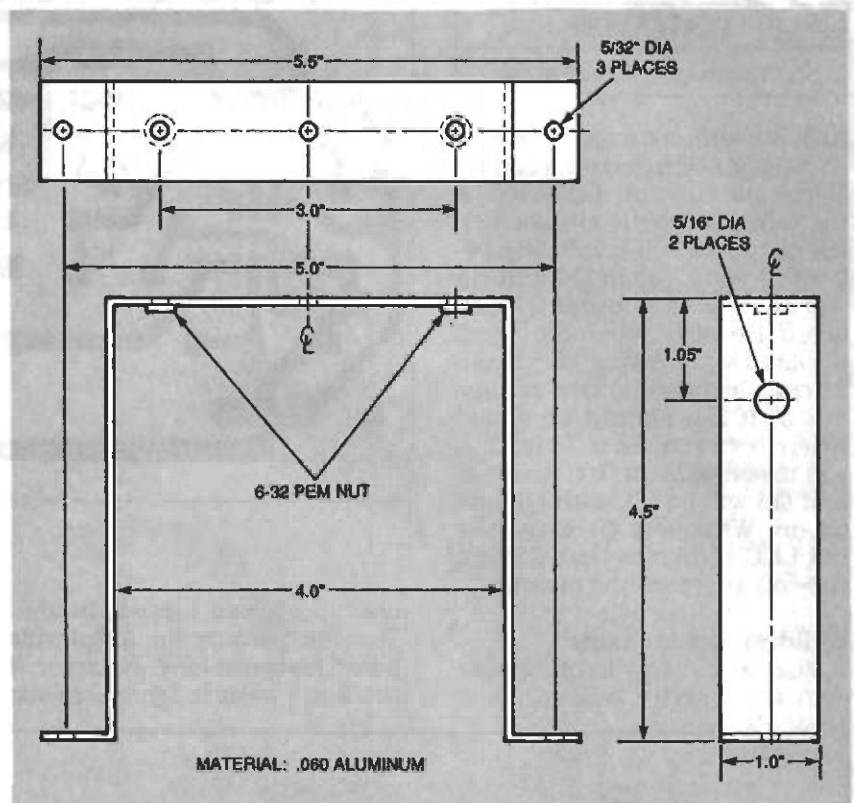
AN ALUMINUM BRACKET should be fabricated as shown.
